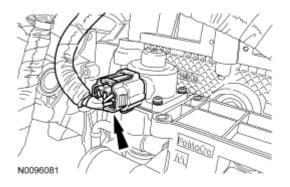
Locating EGR Valve Electrical Connector Courtesy of FORD MOTOR CO.
